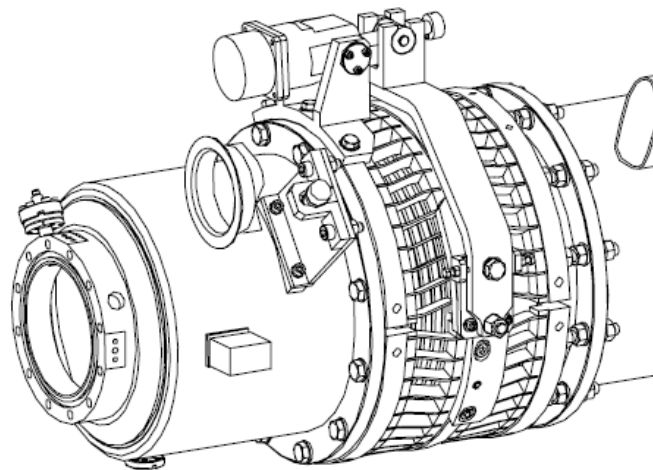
drawing of the original Blade Tuner (SuTu tuner) assembly
